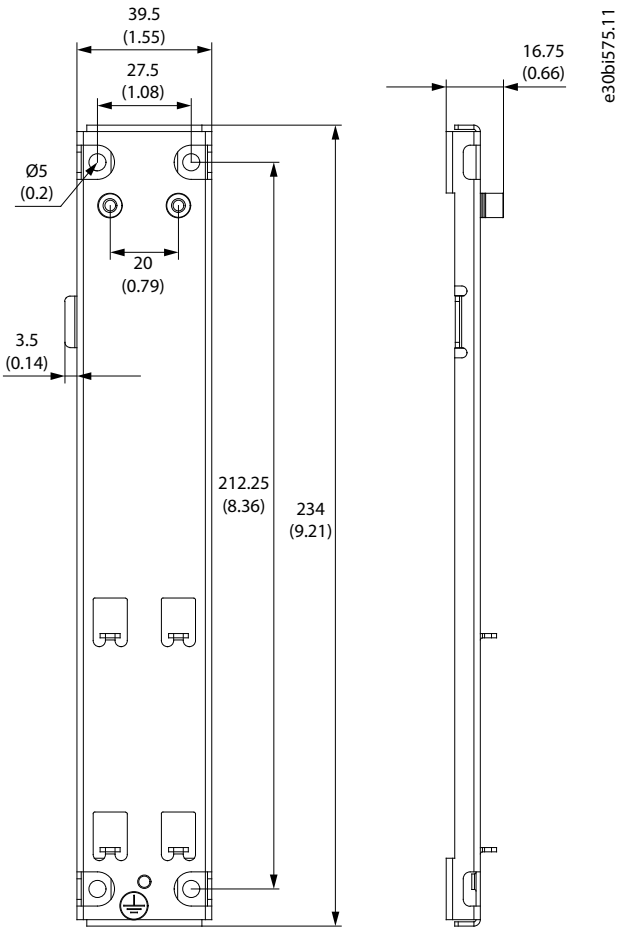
Dimensions of the Modular Control Unit Mounting Plate in mm (in), 2 Places
